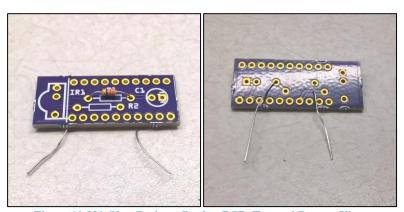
330 Ohm Resistor fixed to PCB, Top and Bottom Views
